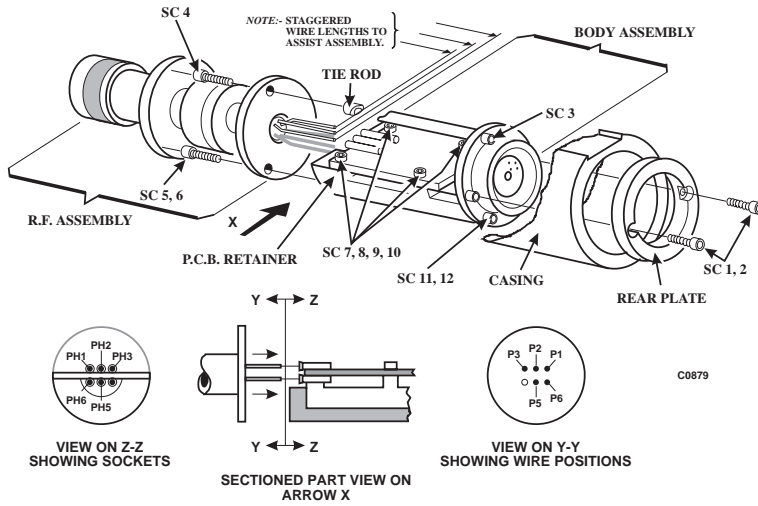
Access and Layout Diagram - 6920 Sensor
